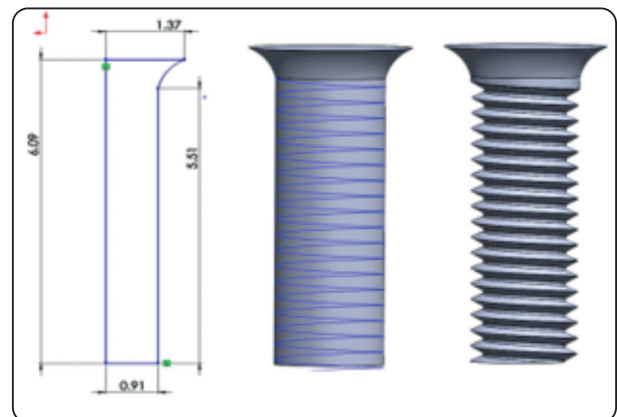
(A) Sketch for half the screw with dimensions, (B) helix of the screw, (C) screw threads
